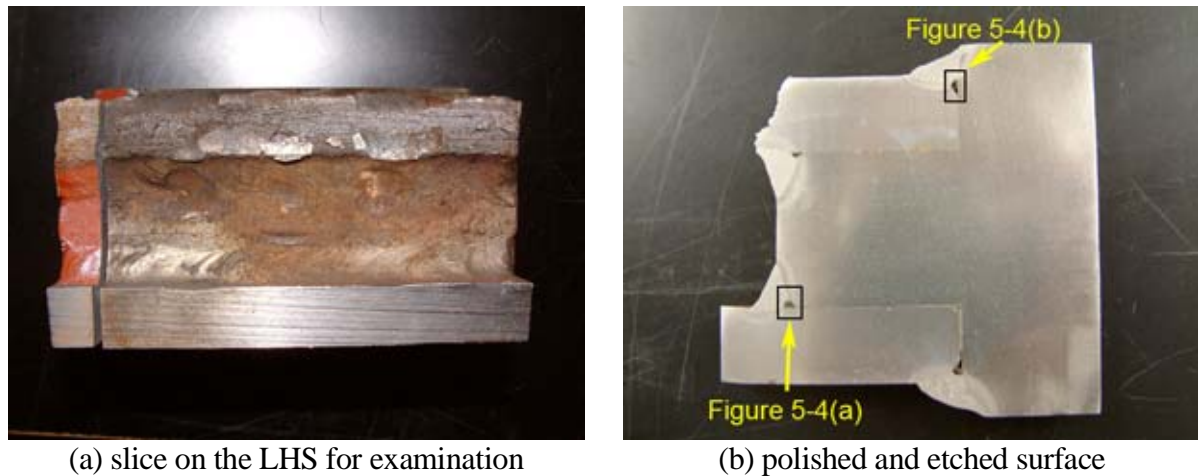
Cross-section sample for examination of welded joints
